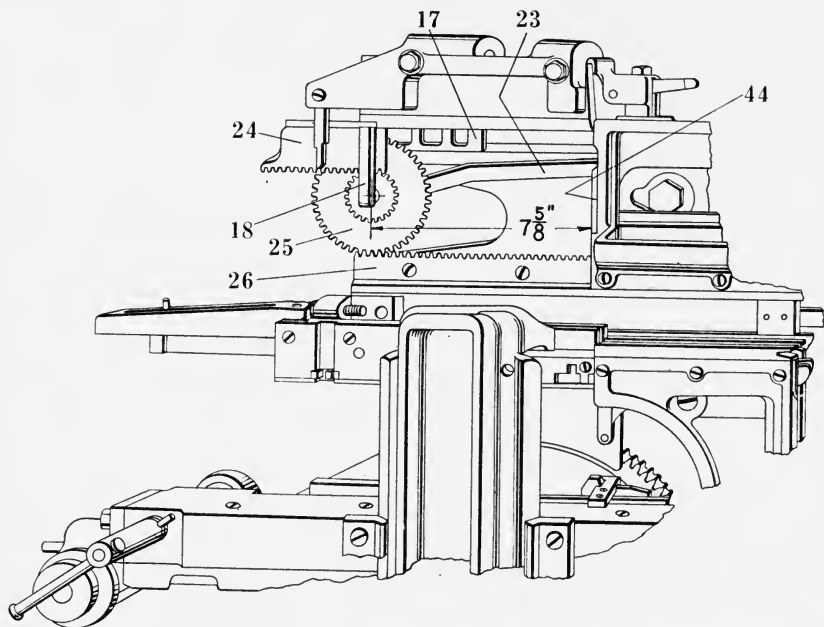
The 42-em Elevator Transfer Slide Mechanism. While the machine is standing at normal position, there should be $7\frac{5}{8}$ " space between the elevator transfer slide finger 18 and the first elevator duplex rail return plate 44 at the left side of the transfer channel. This adjustment is obtained with the elevator transfer lever shaft cam roller arm 7, Fig. 113.
